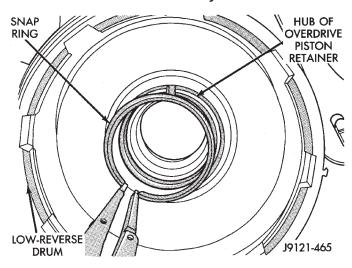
Removing/Installing Low-Reverse Drum Snap Ring—46RH
